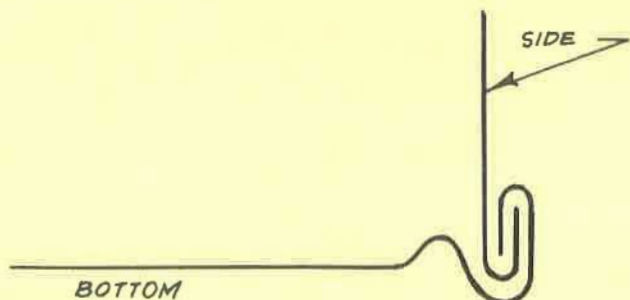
Machine stamped bottom and double seam. ca.1890—1900
